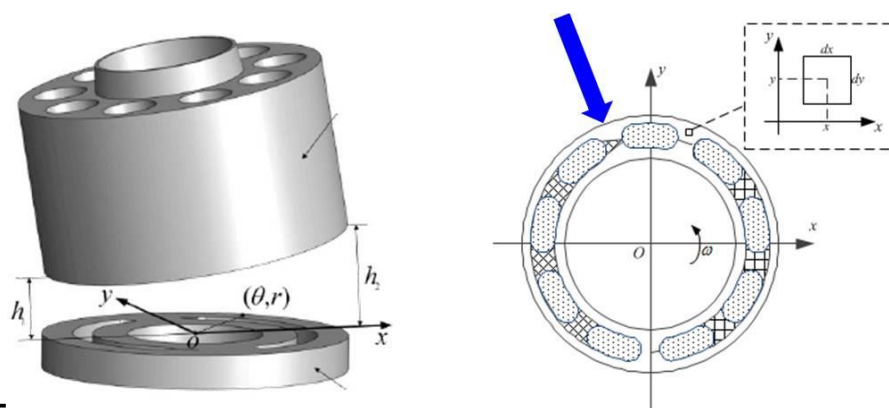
Wedge-shaped oil film between cylinder block and valve plate
